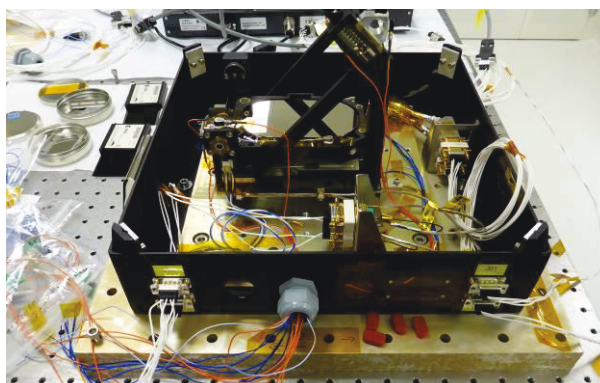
SSM QM assembly on interface plate with integrated sensors inside frame with mounting plate
